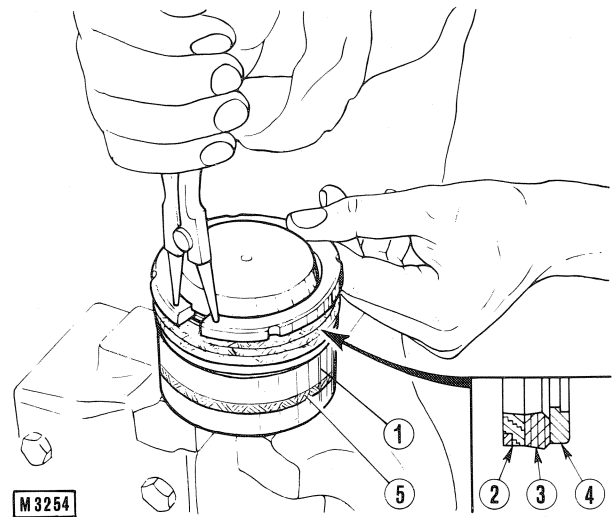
Installation (removal) of hydraulic adjuster piston (1) seal.
